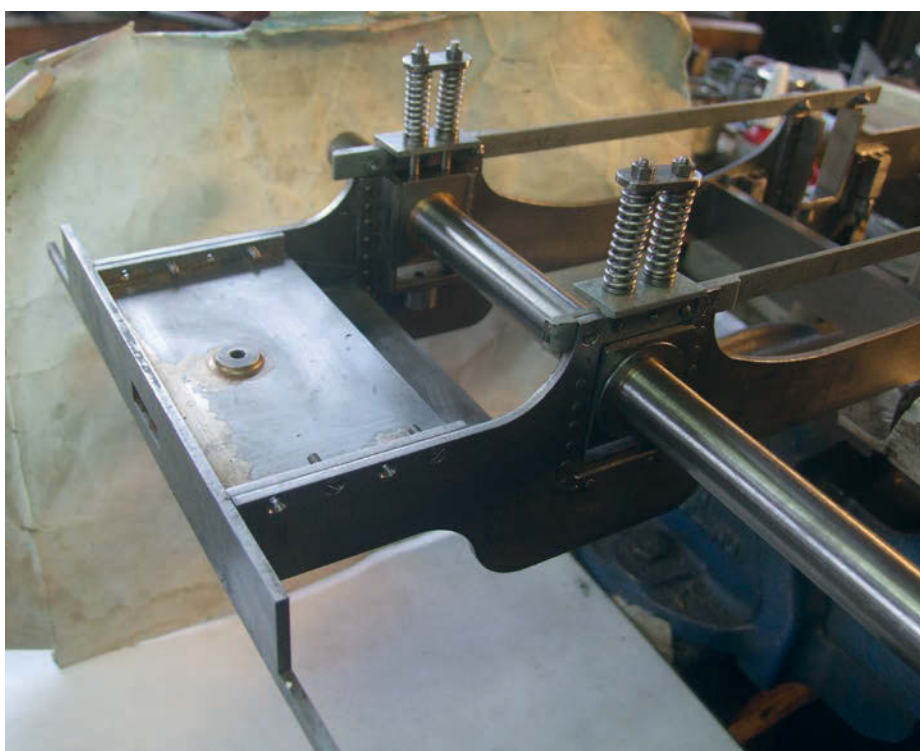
A view of the drag box assembly fitted to the frames with the rear axleboxes and their springing.
